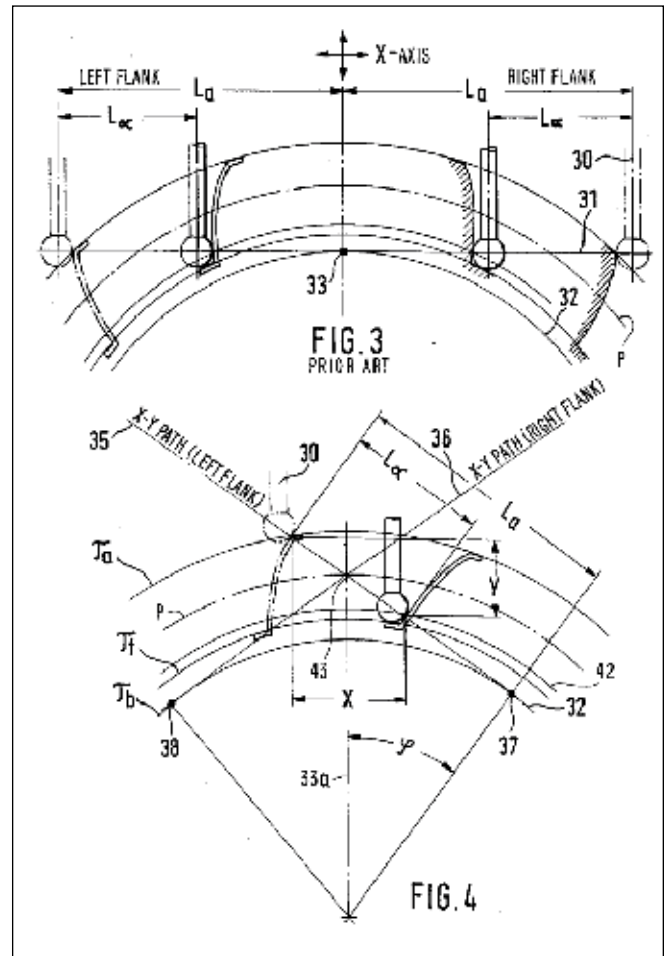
Figures 3 and 4 of the U.S. Patent No. 4,852,402, “Method and Apparatus for Checking or Testing the Profile of Gear Flanks, Particularly of Involute Gears.”
